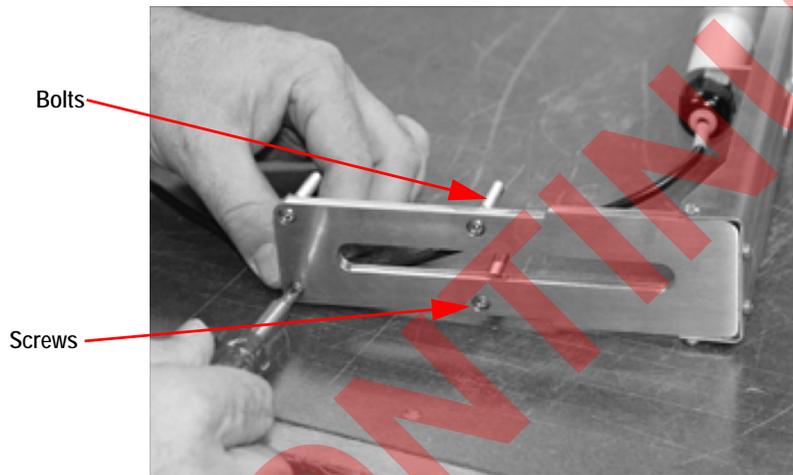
Loosen Four Screws on Bottom of Antenna Assembly
